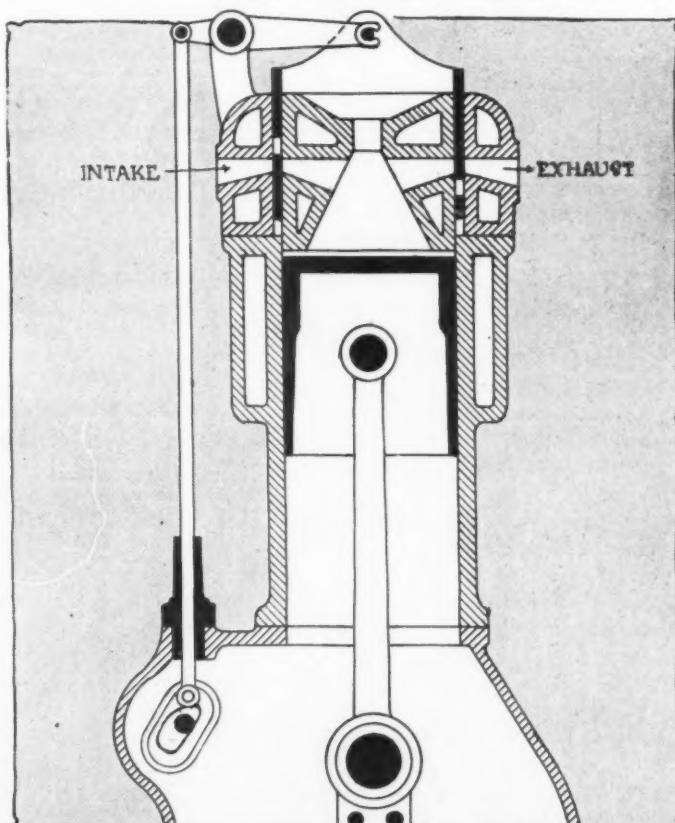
Cam-operated overhead sleeve-valve of Diehl motor
